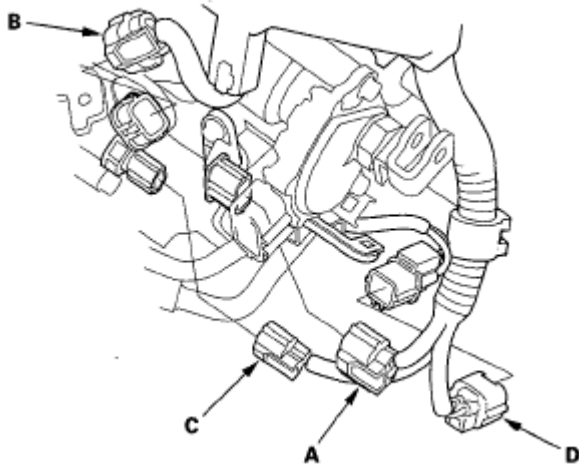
Identifying Input Shaft (Mainshaft) Speed Sensor Connector And 3rd Clutch Transmission Fluid Pressure Switch Connector
